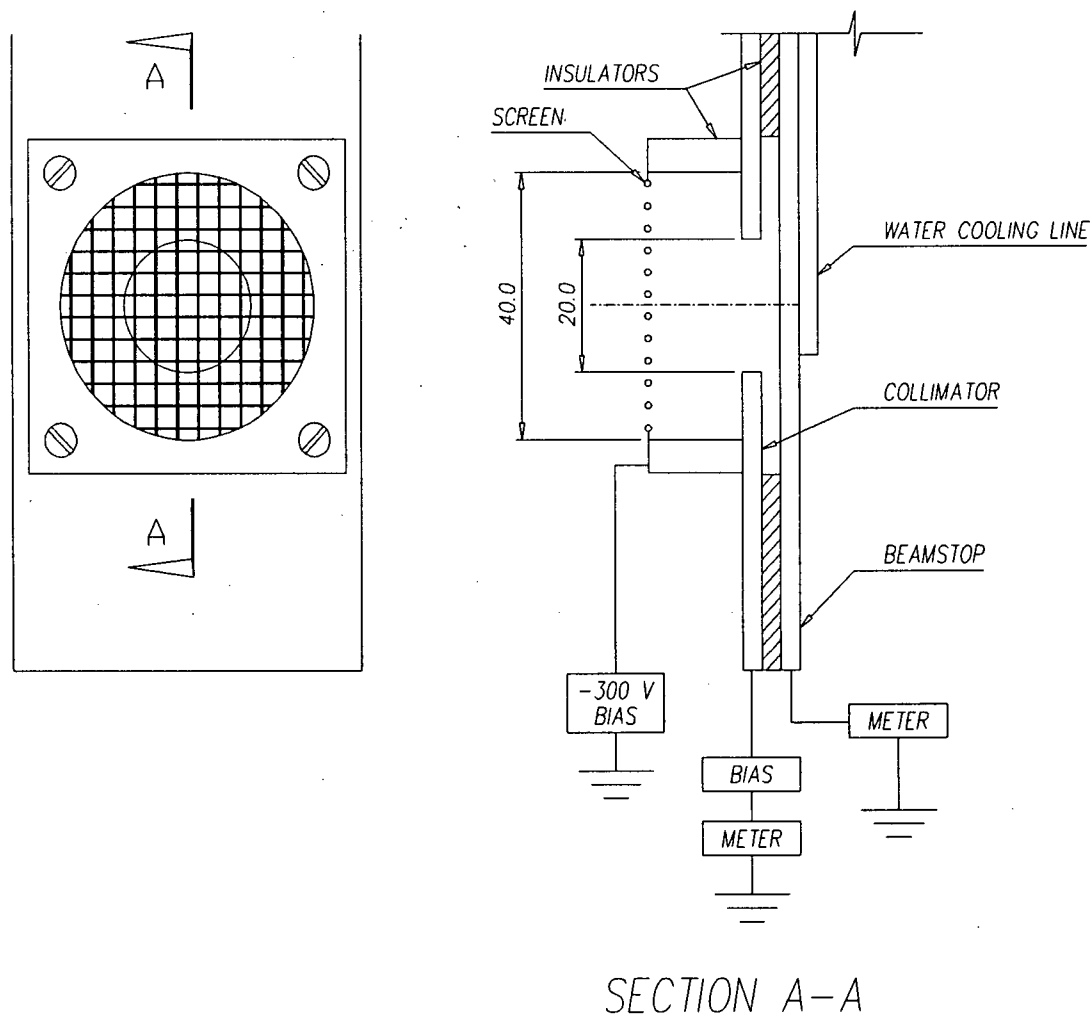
Ion source beamstop assembly. Dimensions in millimetres.
